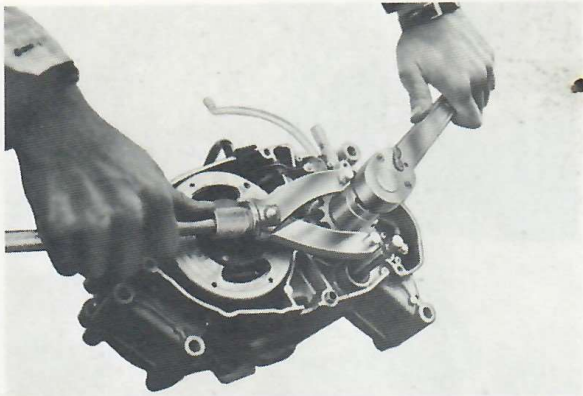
Unscrewing sprocket set nut with 24 mm wrench and engine sprocket & flywheel holder (09930-40113)
